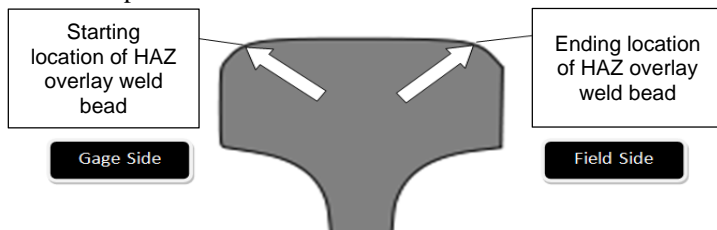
Weld Start and End Locations on the Railhead for the Overlay Treatment of the HAZ
